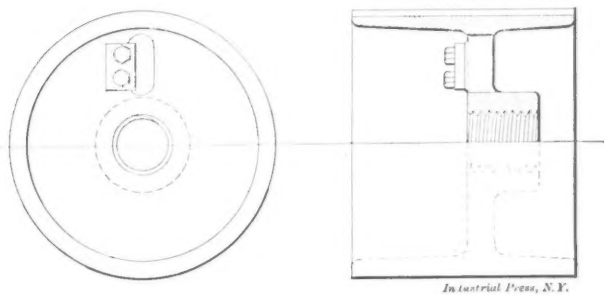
Gear for Driving Cam in relieving Formed Cutters.
